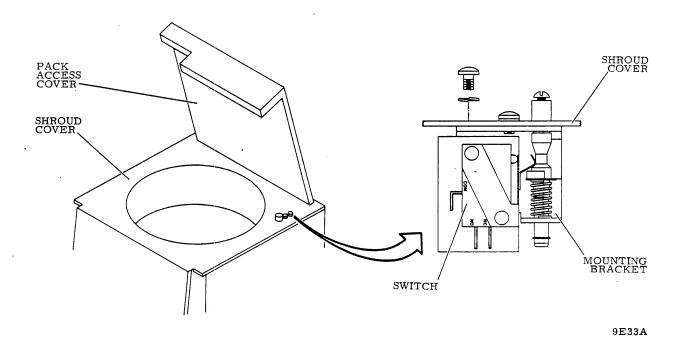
Pack Access Cover Switch Replacement (Non-VDE)
